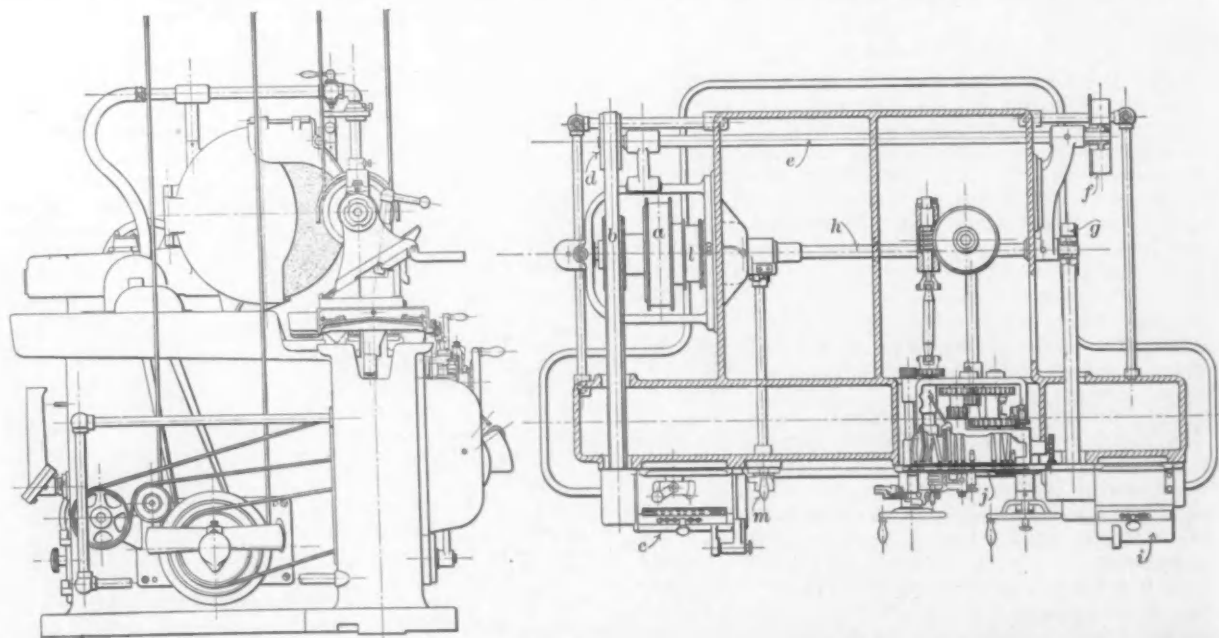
Left End Elevation and Horizontal Section of the Machine
